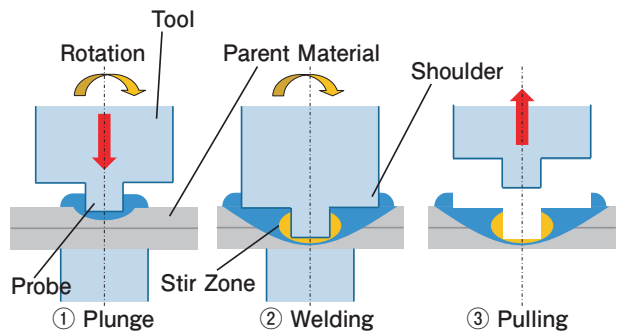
Schematic drawing of friction stir spot welding.
